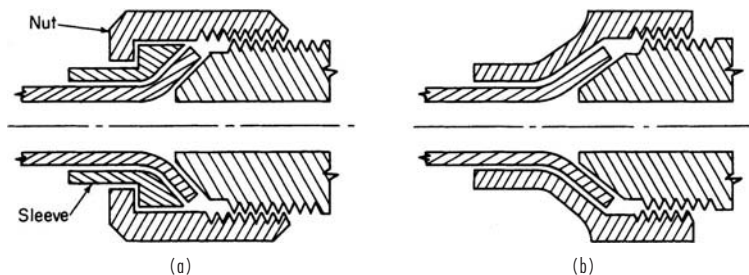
Flared-fitting joint. (a) Three-piece. (b) Two-piece.
